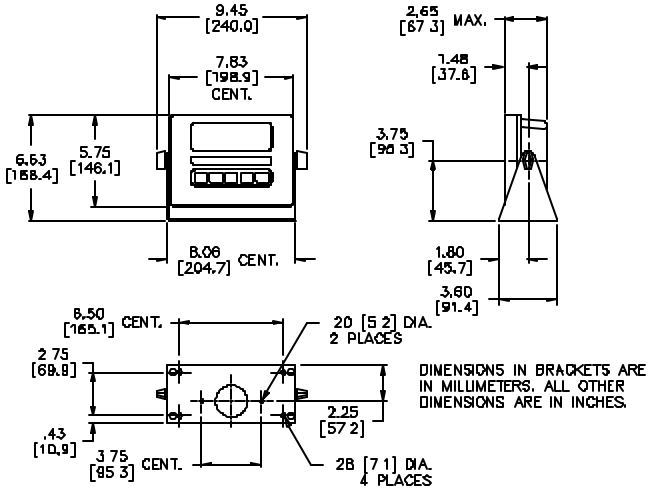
Model 350 Zinc Die Cast Front Dimensions
